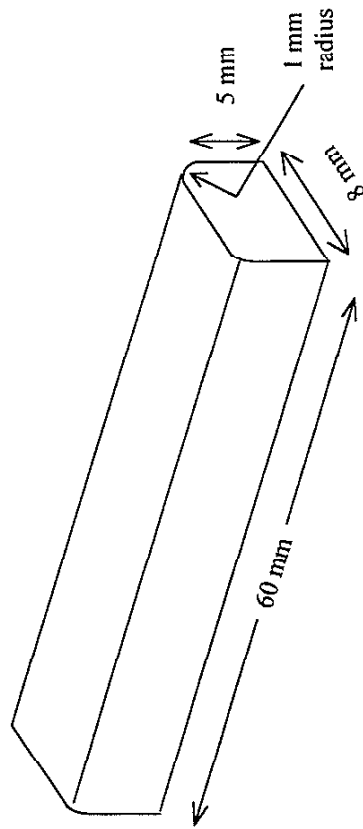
4340 Four-Point Bend Fatigue Specimen
